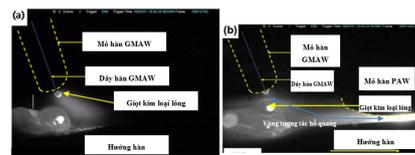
Observation of weld pool and droplet during welding by HSVC [7]. (a) The metal transfer of GMAW welding; (b) The metal transfer of Plasma-GMAW hybrid.
